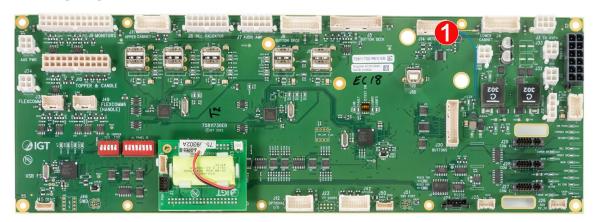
Fledging Board Connector on Cabinet Controller Board
